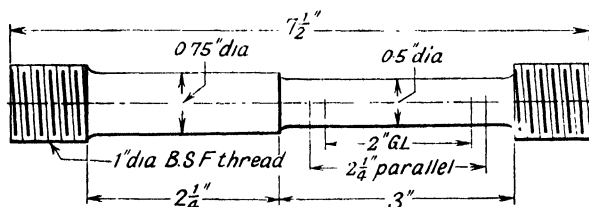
ALTERNATIVE FORM OF TEST PIECE
